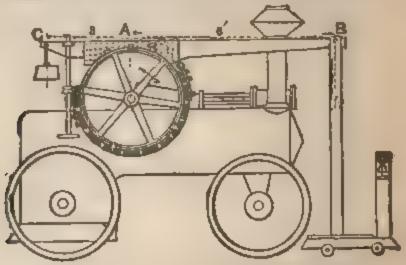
BRAKE APPLIED TO PORTABLE ENGINE.
